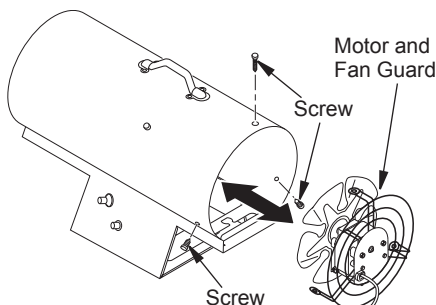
Removing Motor and Fan Guard from Heater (Heater may vary from illustration)
